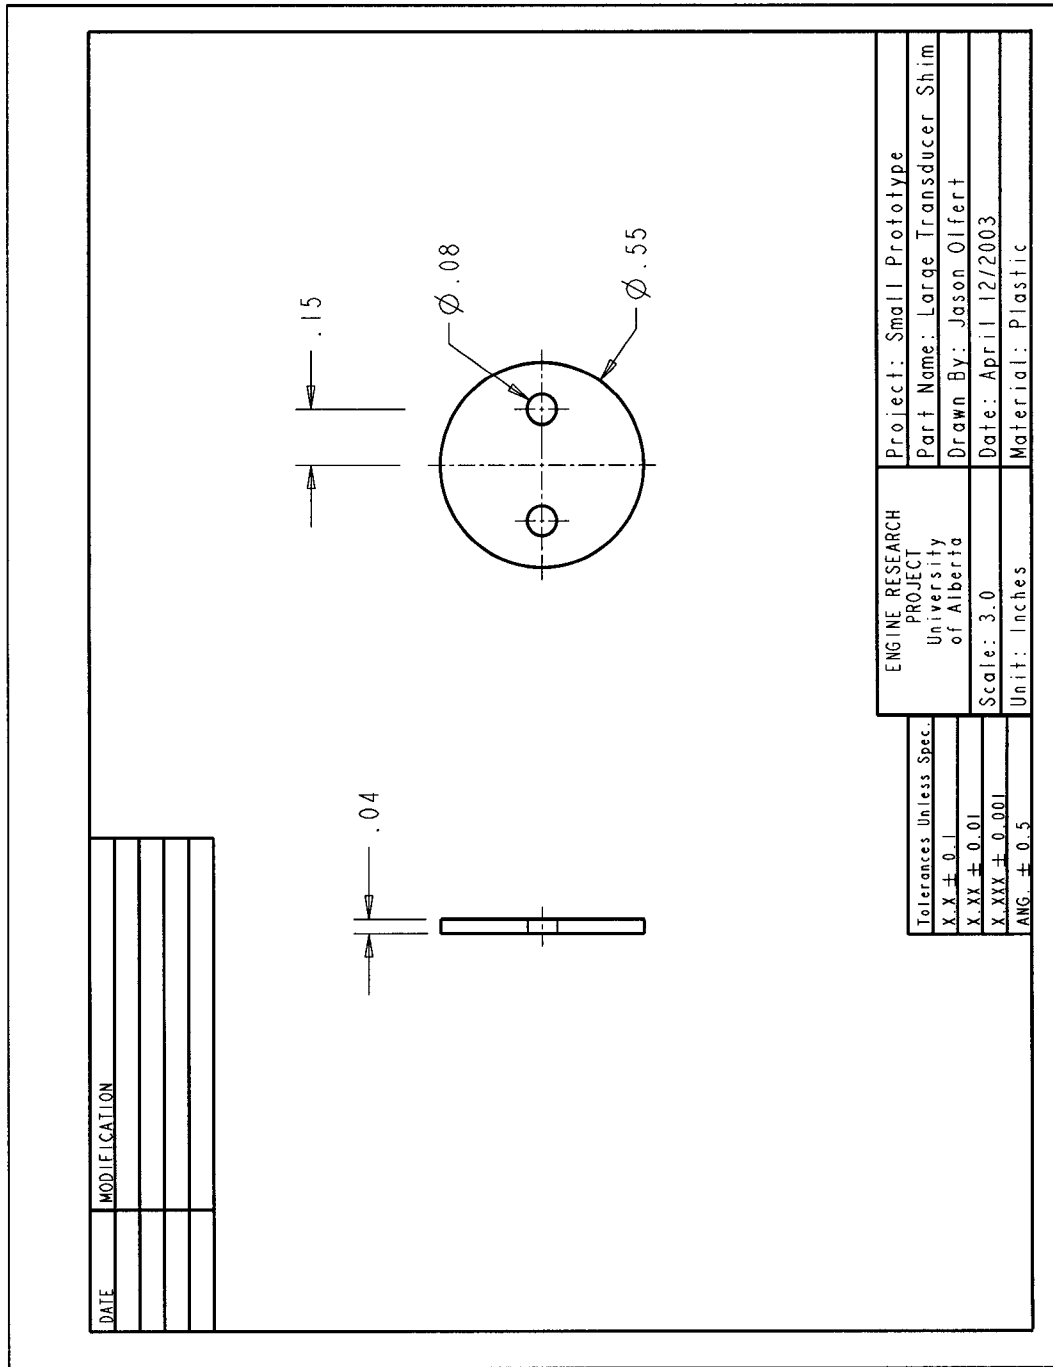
Drawing of Large Transducer Shim of Small Prototype
